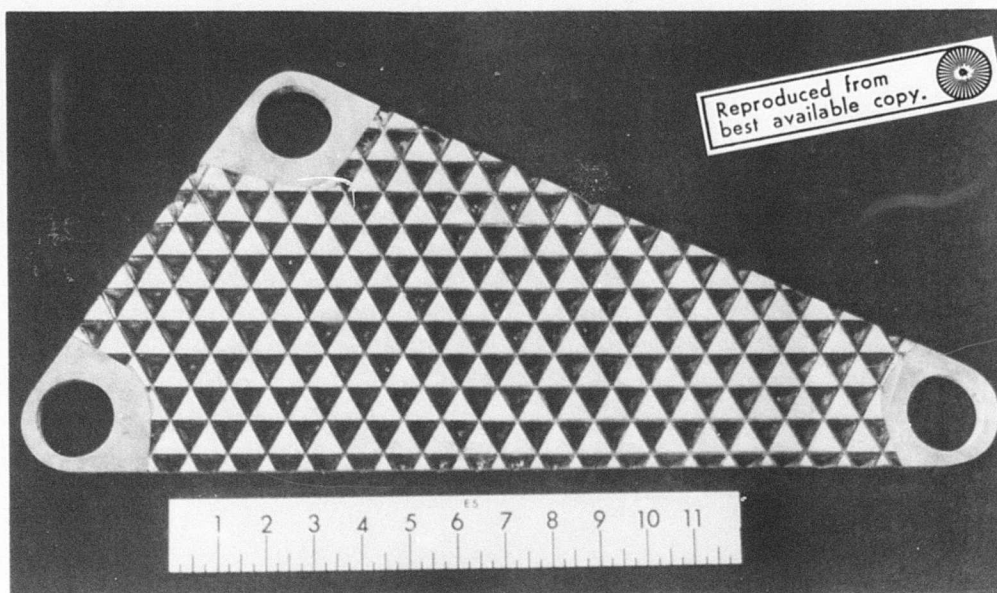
"Tetra-Core" Face Sheet With Precured 181 Glass Cloth Bearing Attachments.
